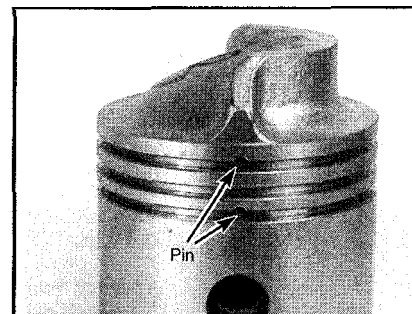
Evinrude/Johnson 2-stroke piston ring grooves are equipped with dowels on which to align the ring gaps
